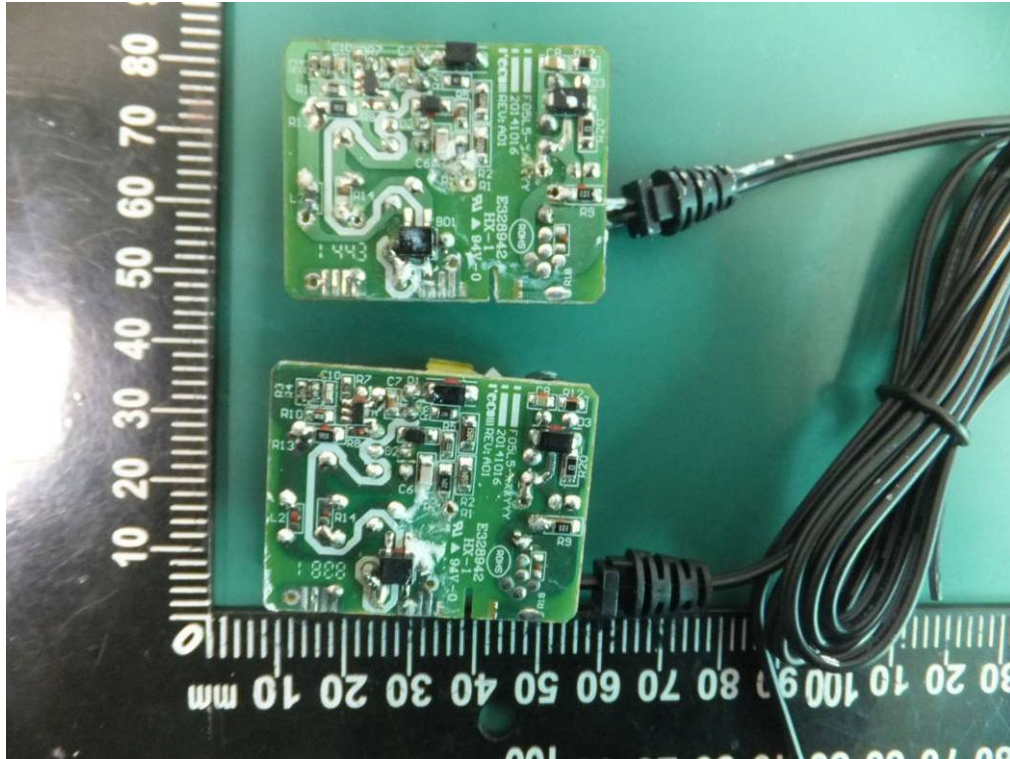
Bottom view of PCB for F05L5-xxxxyySPAU
